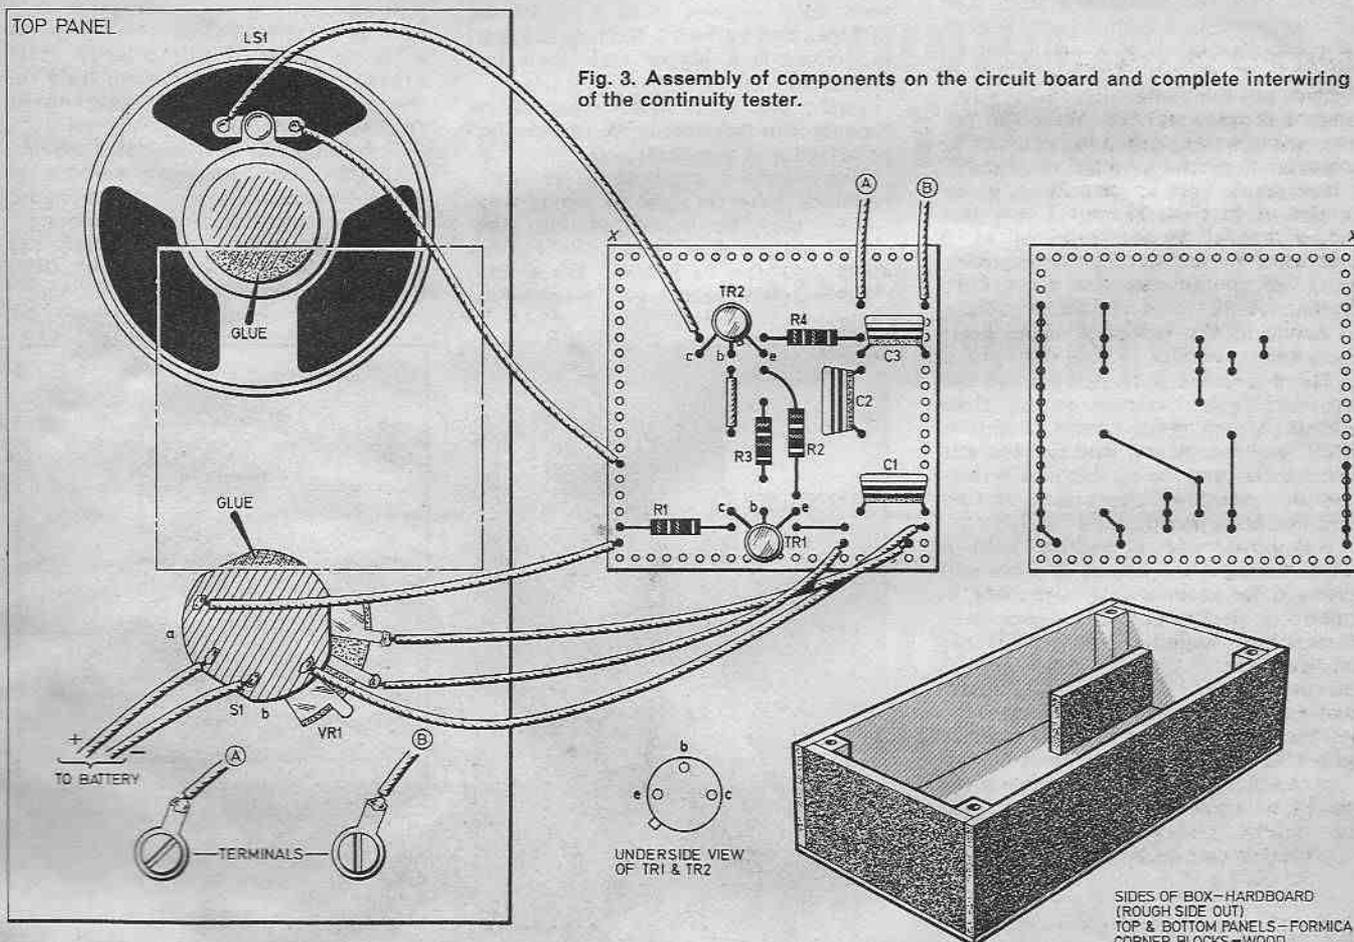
Assembly of components on the circuit board and complete interwiring of the continuity tester.
